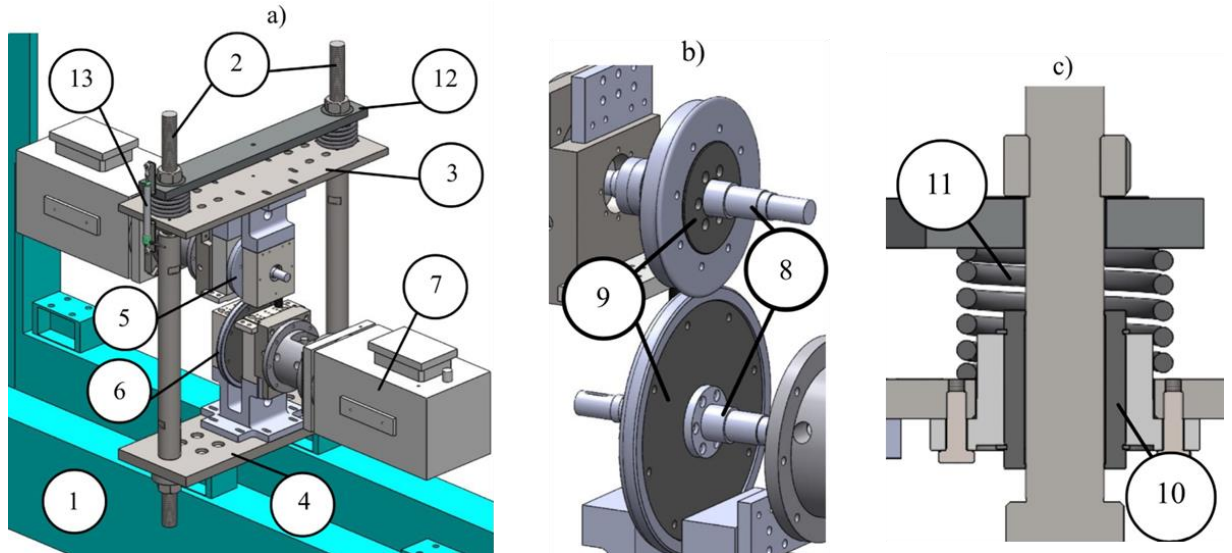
(a) CAD model of the novel twin-disc tribometer; (b) detail of the wheel and rail rollers and; (c) detail of the helical spring and linear bearing.
